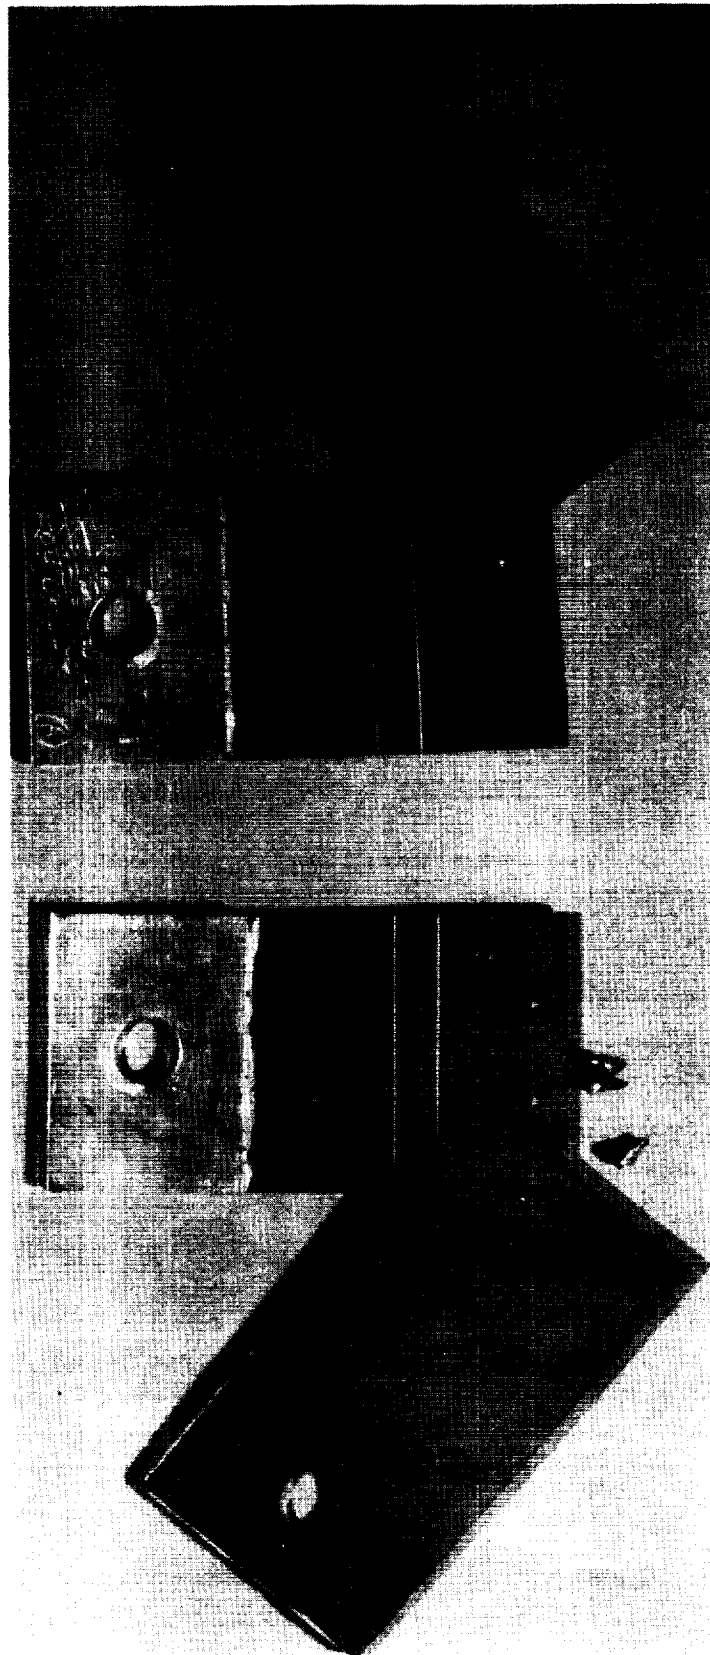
TYPE IVC SPECIMENS - TYPICAL FAILURE MODE
